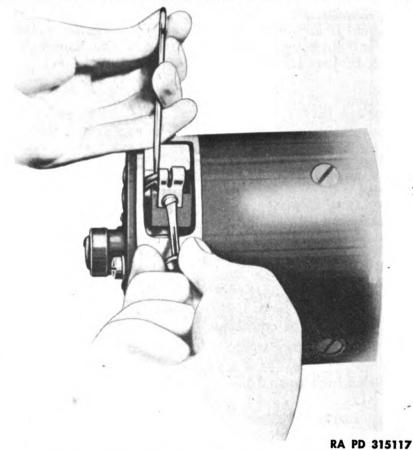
Disconnecting Brush Lead and Removing Brushes on Group 2 Motors
